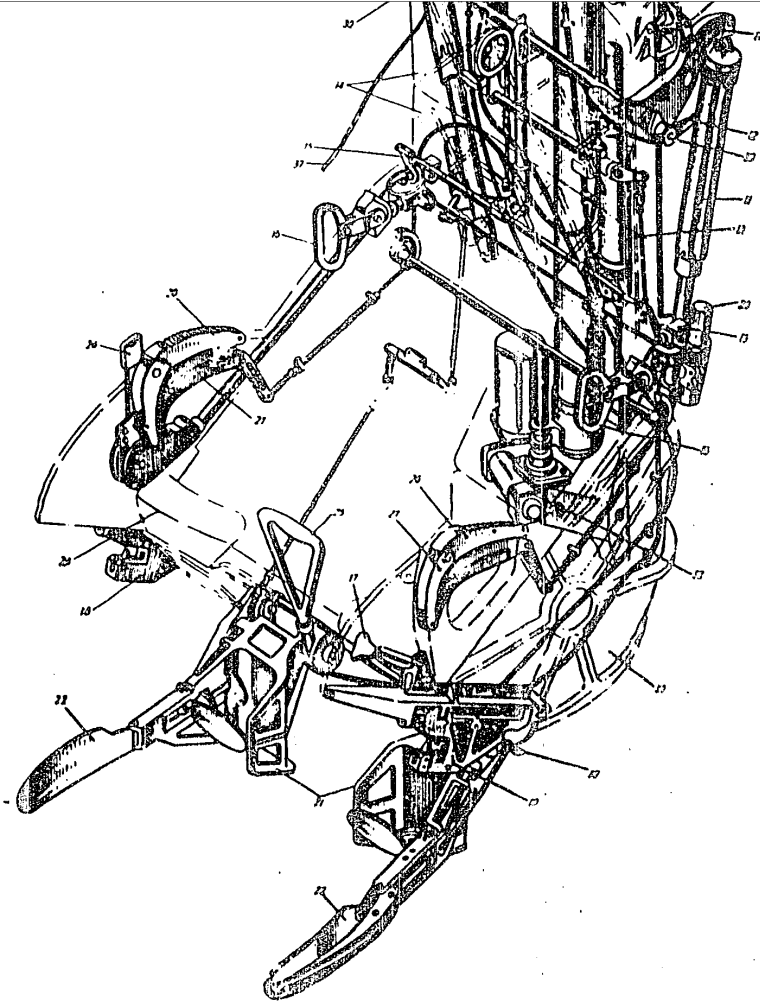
MECHANICAL ASSEMBLY. GENERAL VIEW.
